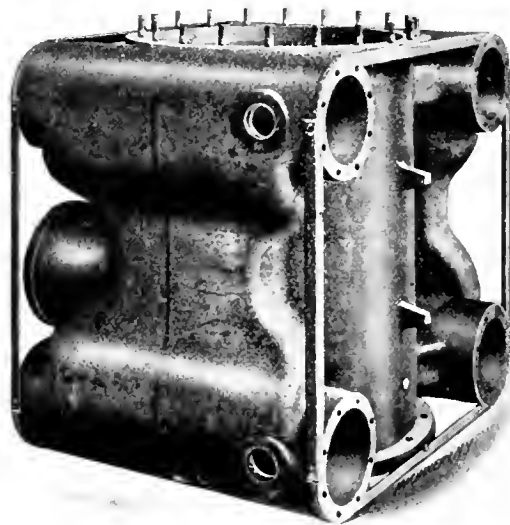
Method of attaching the Lagging to the Cylinder Casting.
